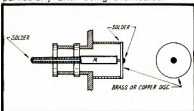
Dummy antenna made by mounting a composition resistor in a PL-259 coaxial plug. Only the inner portion of the plug is shown, the cap screws on after the assembly is completed.
